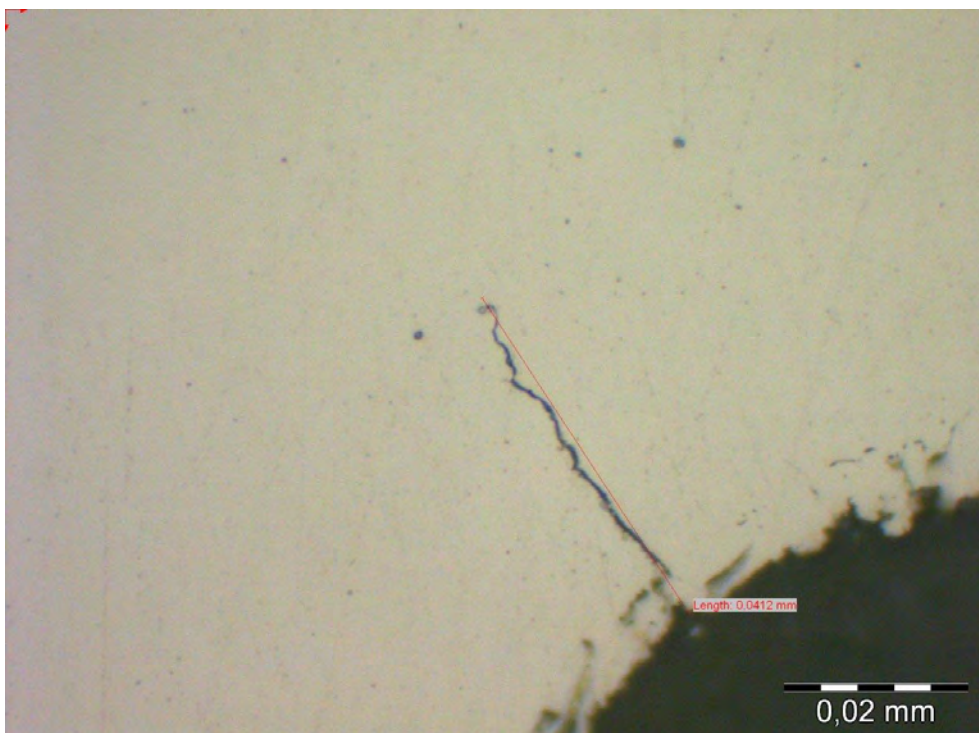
Crack at segment A, second ridge on barrel no. 14389
